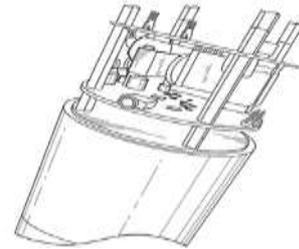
Perspective view of the integrated motor and controller in accordance with the present invention with the housing for the controller removed
